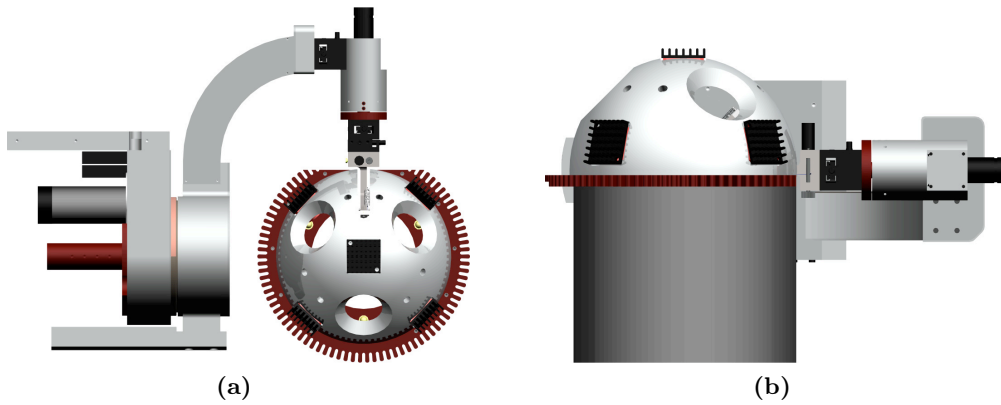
2 DOF gripper unit top (a) and side view (b).
